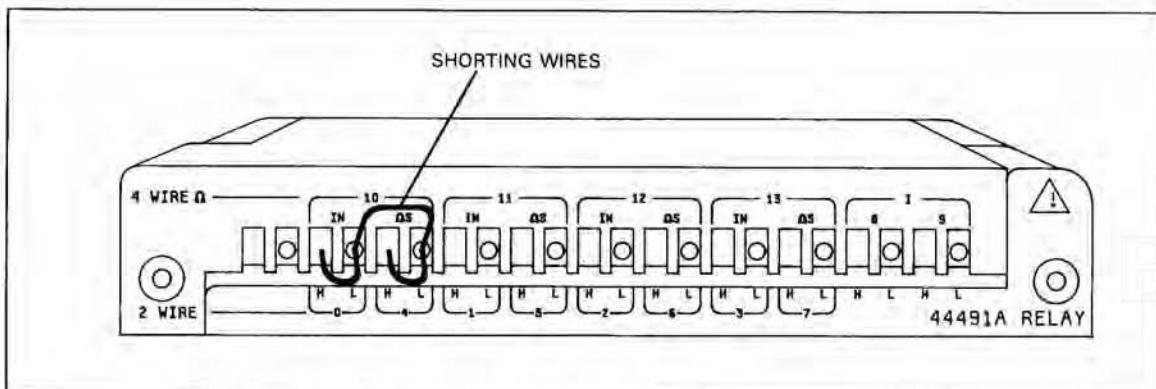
HP 44491A Terminal Block Assembly Connections
